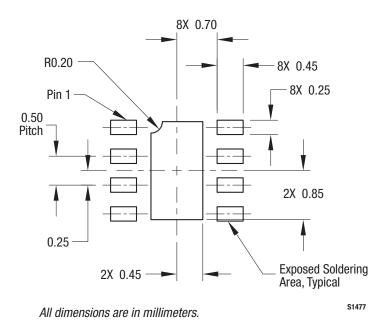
SKY13347-360LF PCB Layout Footprint (Top View)
